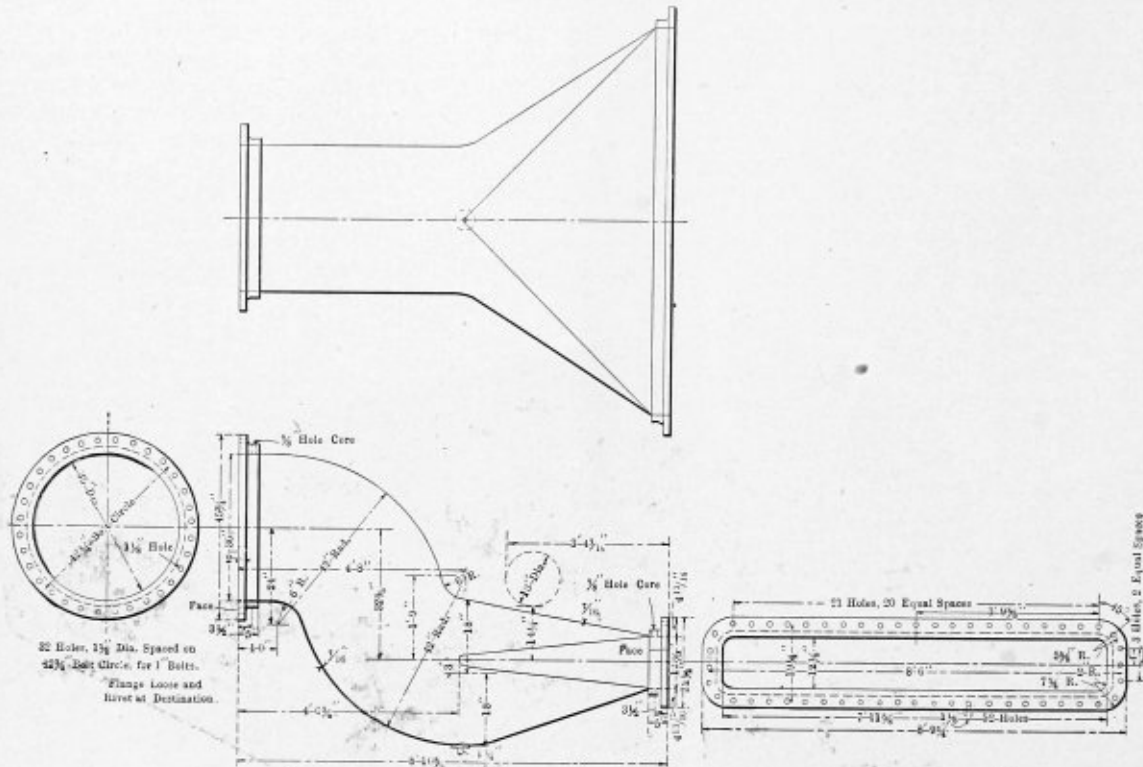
BLUE PRINT AS SENT FROM DRAUGHTING ROOM TO LAYING-OUT BENCH.
